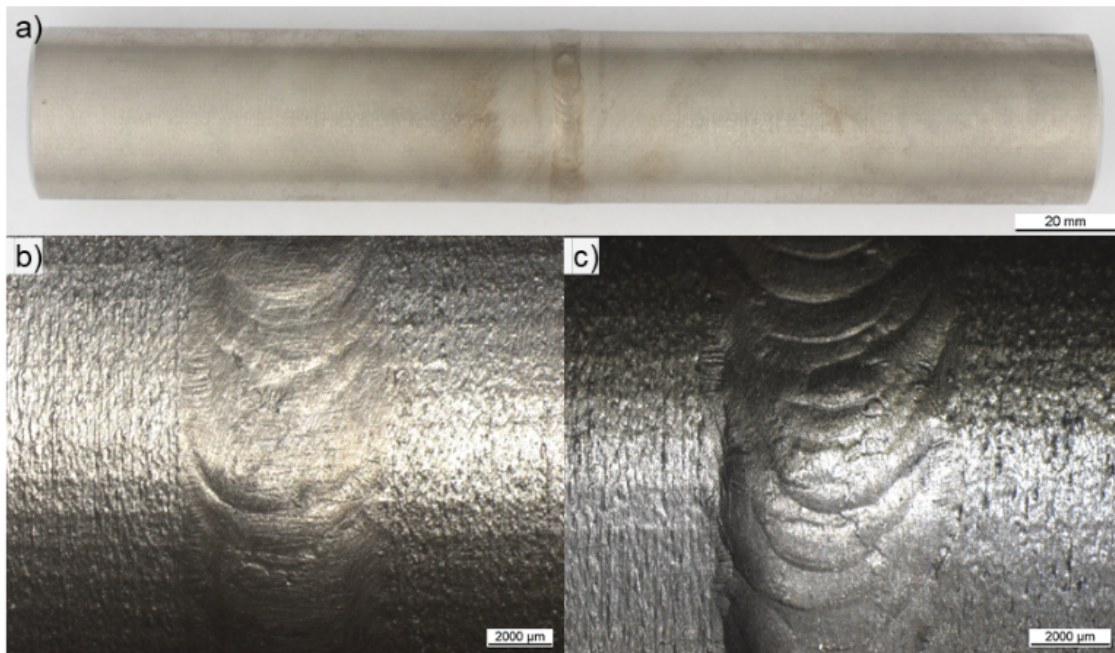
Two pipes TIG-welded together (a), Light microscopy photo (10x) of a weld seam of non-heat treated (b) and heat-treated IN718 (c).
